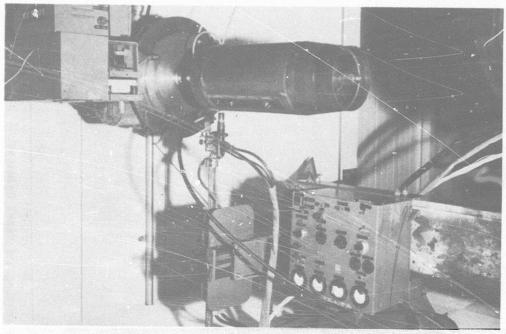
Final Weldment in Semi-Automatic Welder.
